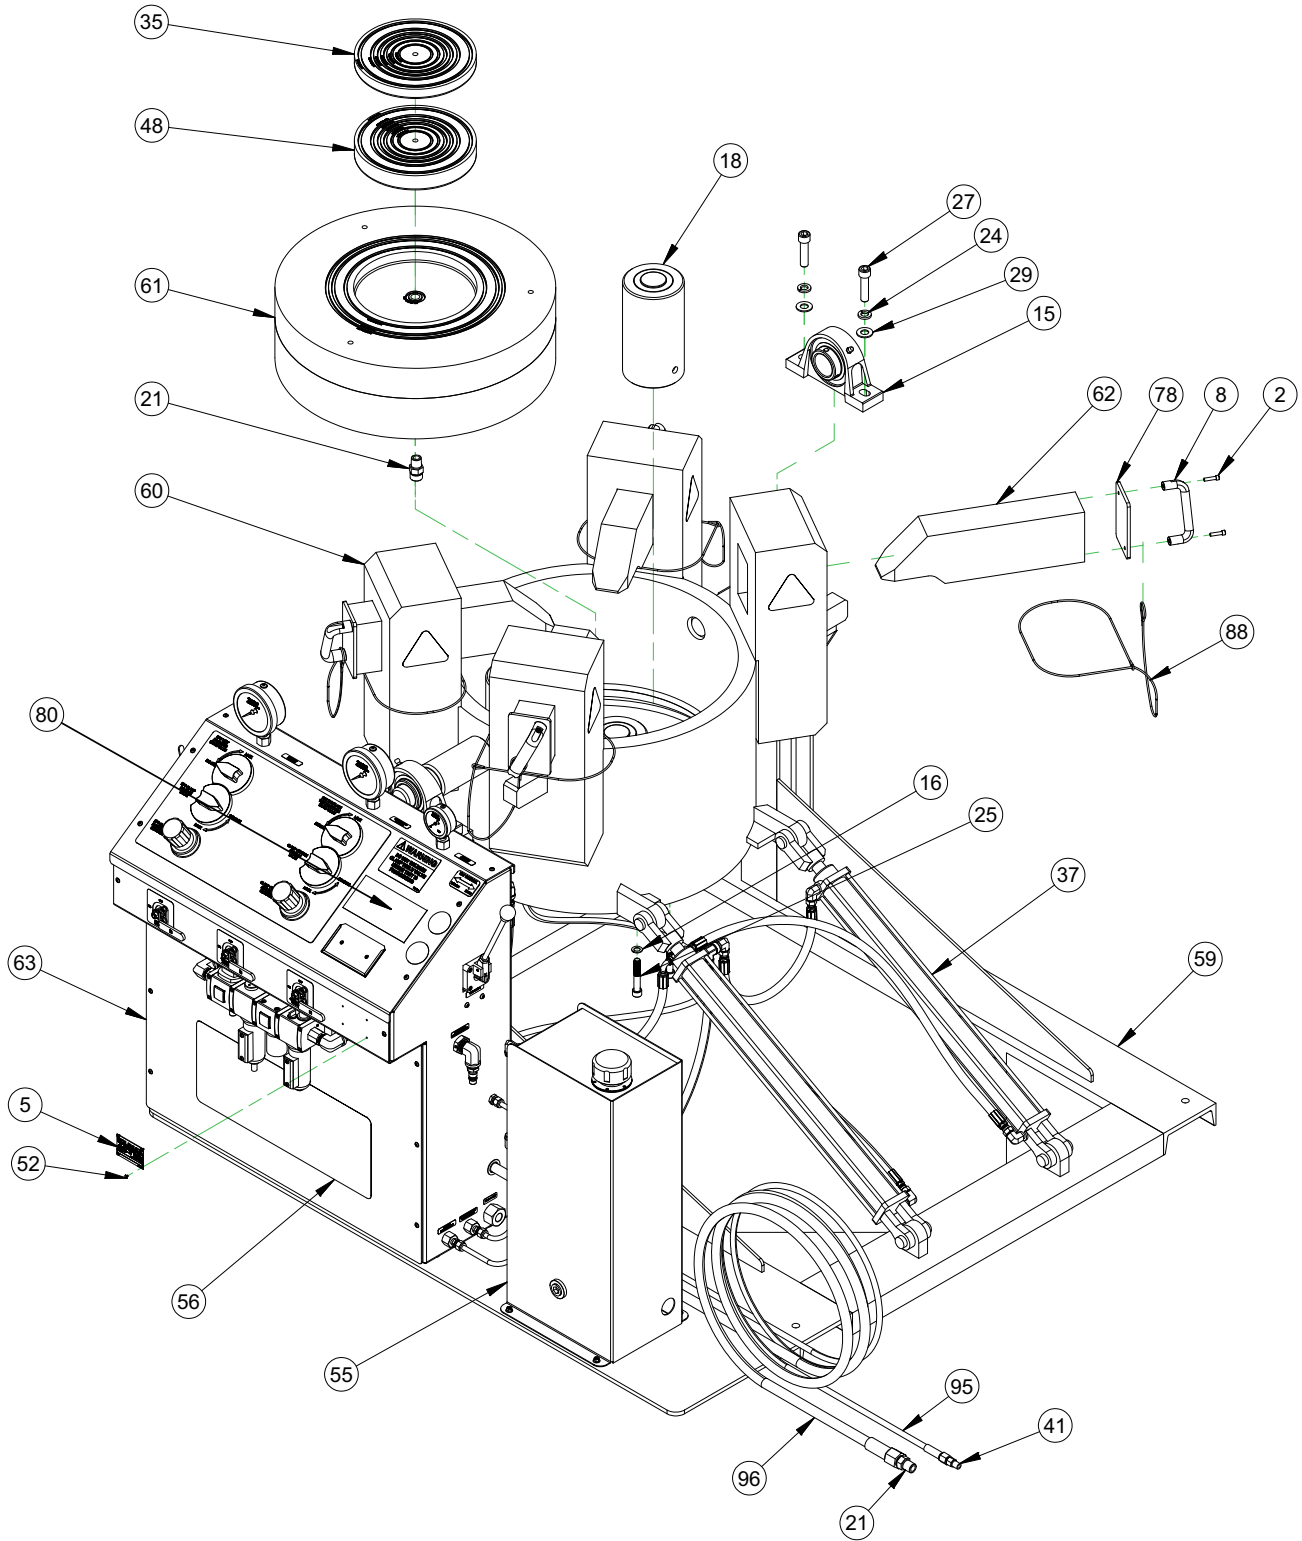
UFV-14-165T VALVE TESTER ASSEMBLY (P/N 88469)
